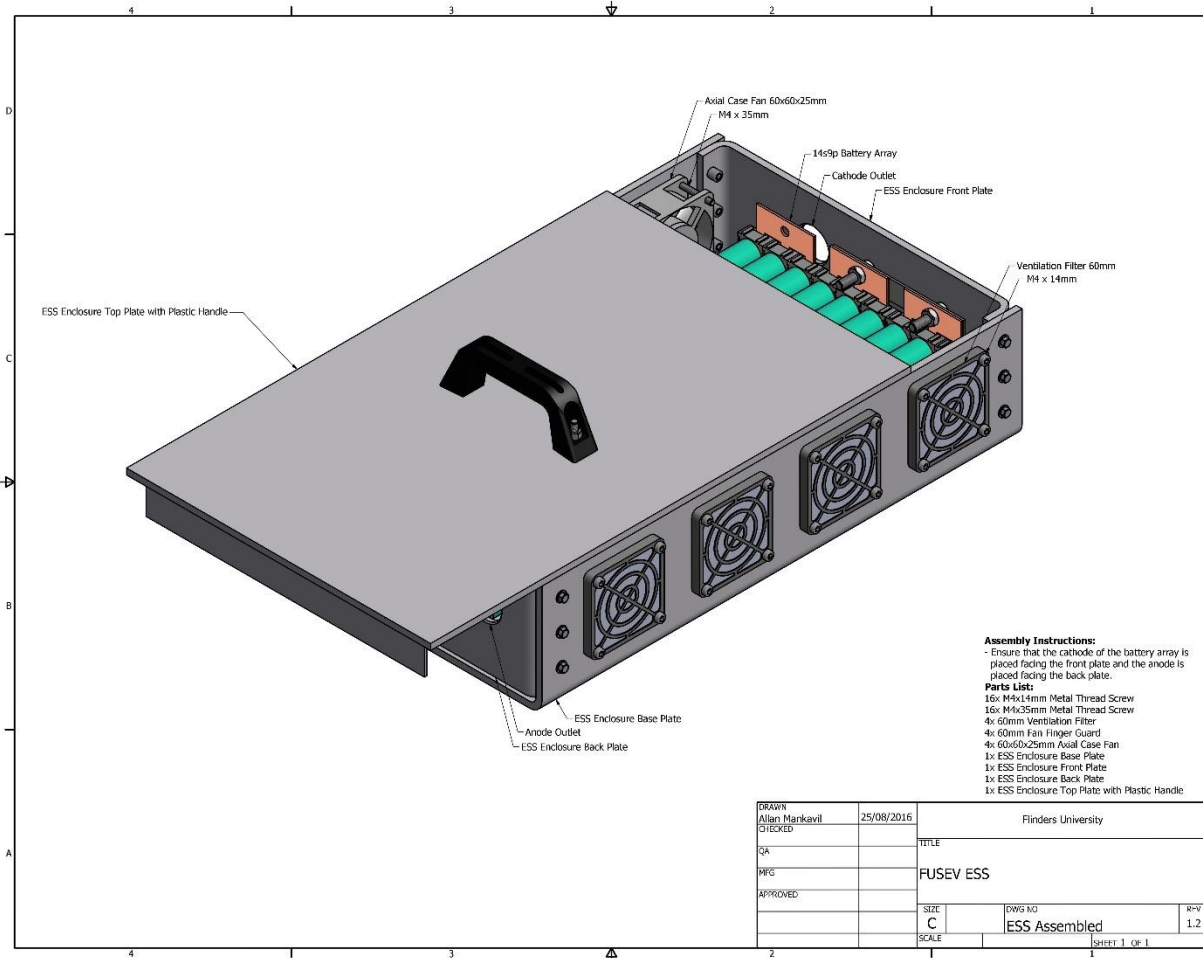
The mechanical drawing of the Assembled ESS Enclosure with BARR and Fixtures.
